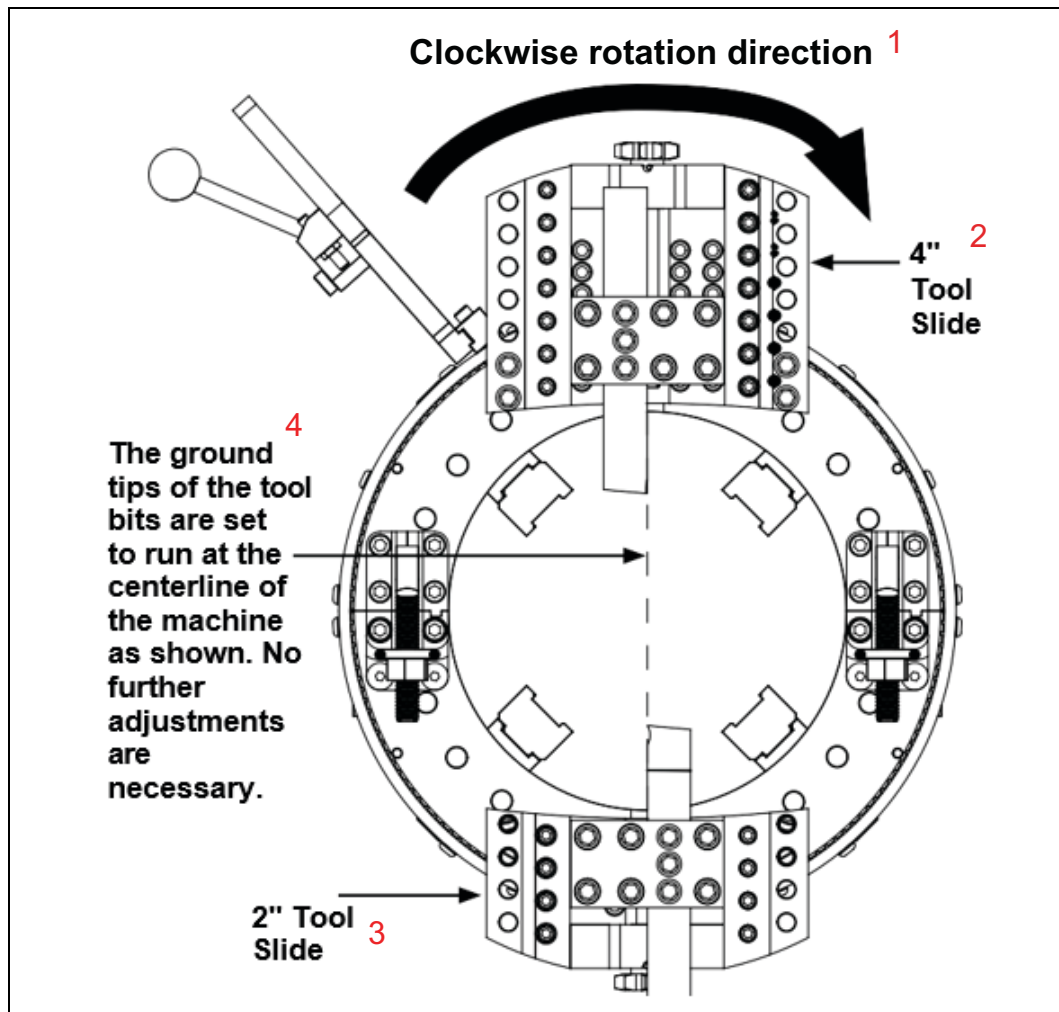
TOOL BITS AND TOOL SLIDES
